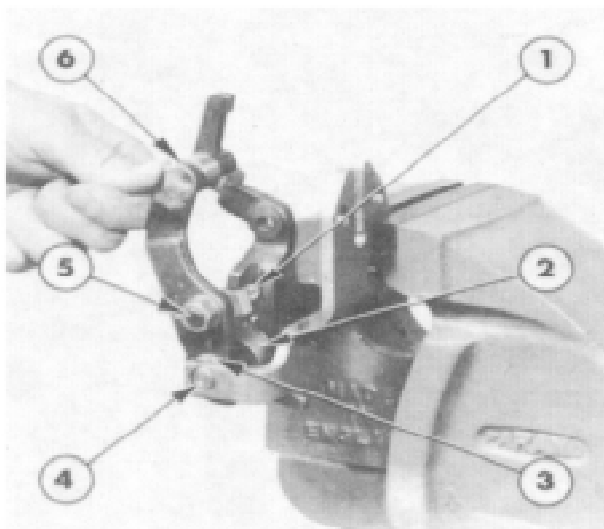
Removing Draft Lever to Actuating Lever Pivot Pin Snap Ring
